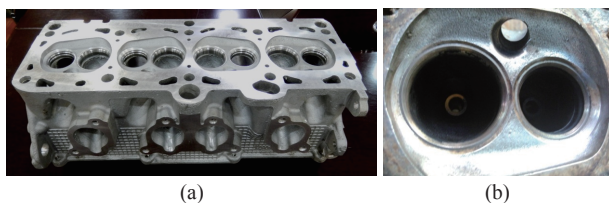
(a) Engine cylinder head made of JDM1 magnesium alloy and (b) surface morphology of the combustion chamber after road tests over 9000 km.
